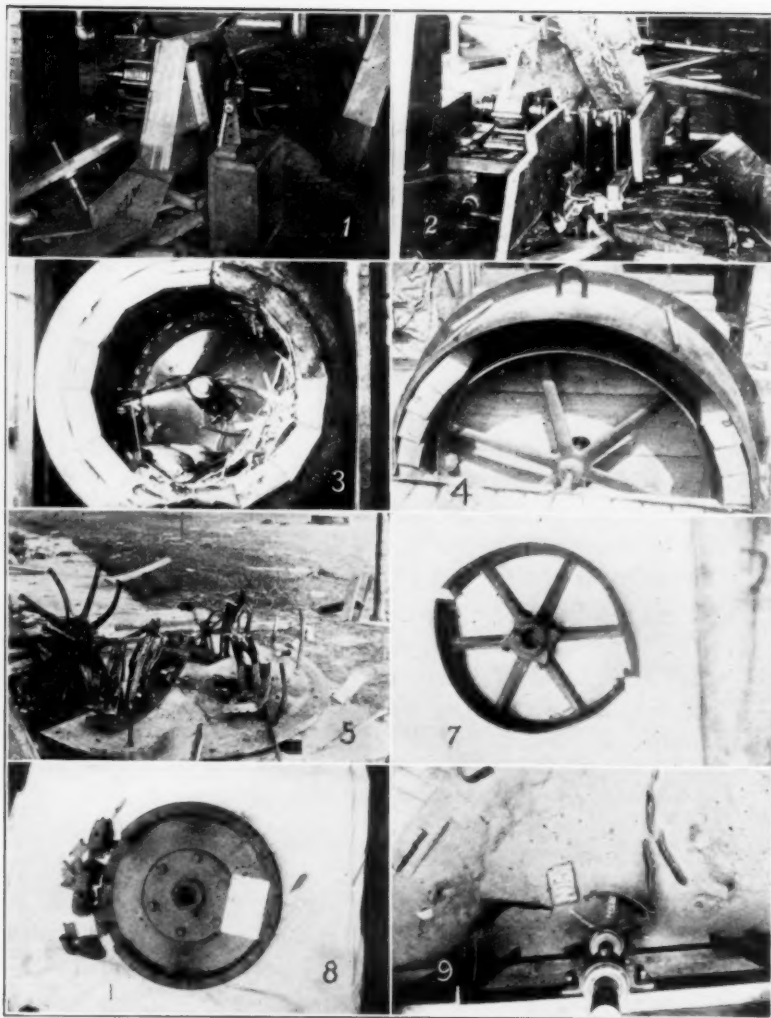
SHIELD OF 2-IN. PINE AFTER EXPLOSION OF 15-IN. WHEEL
